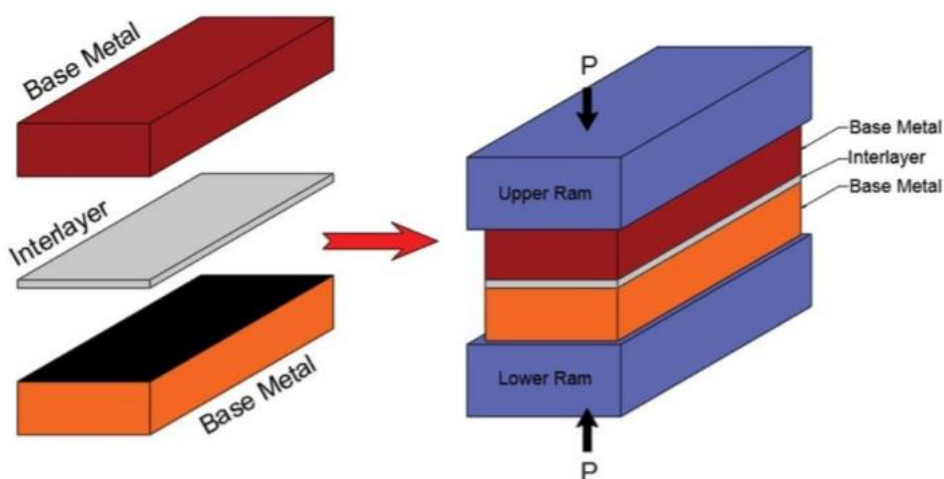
Scheme of diffusion welding with interlayer [7]
